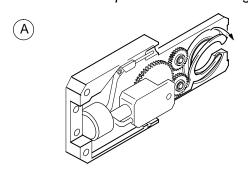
Removing Series 4 Micro Weld Head Components for Cleaning
